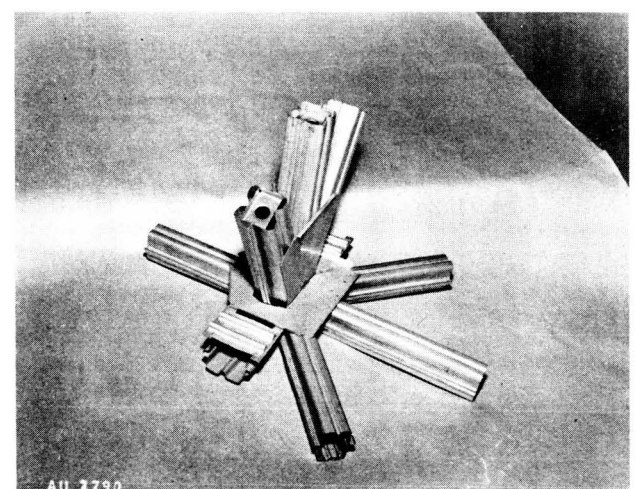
STRUCTURAL SPECIMEN - TYPICAL JOINT
